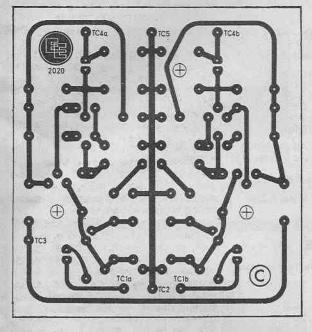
Board C of the 2020 Tuner Amplifier: underside view showing printed circuit (full size).
